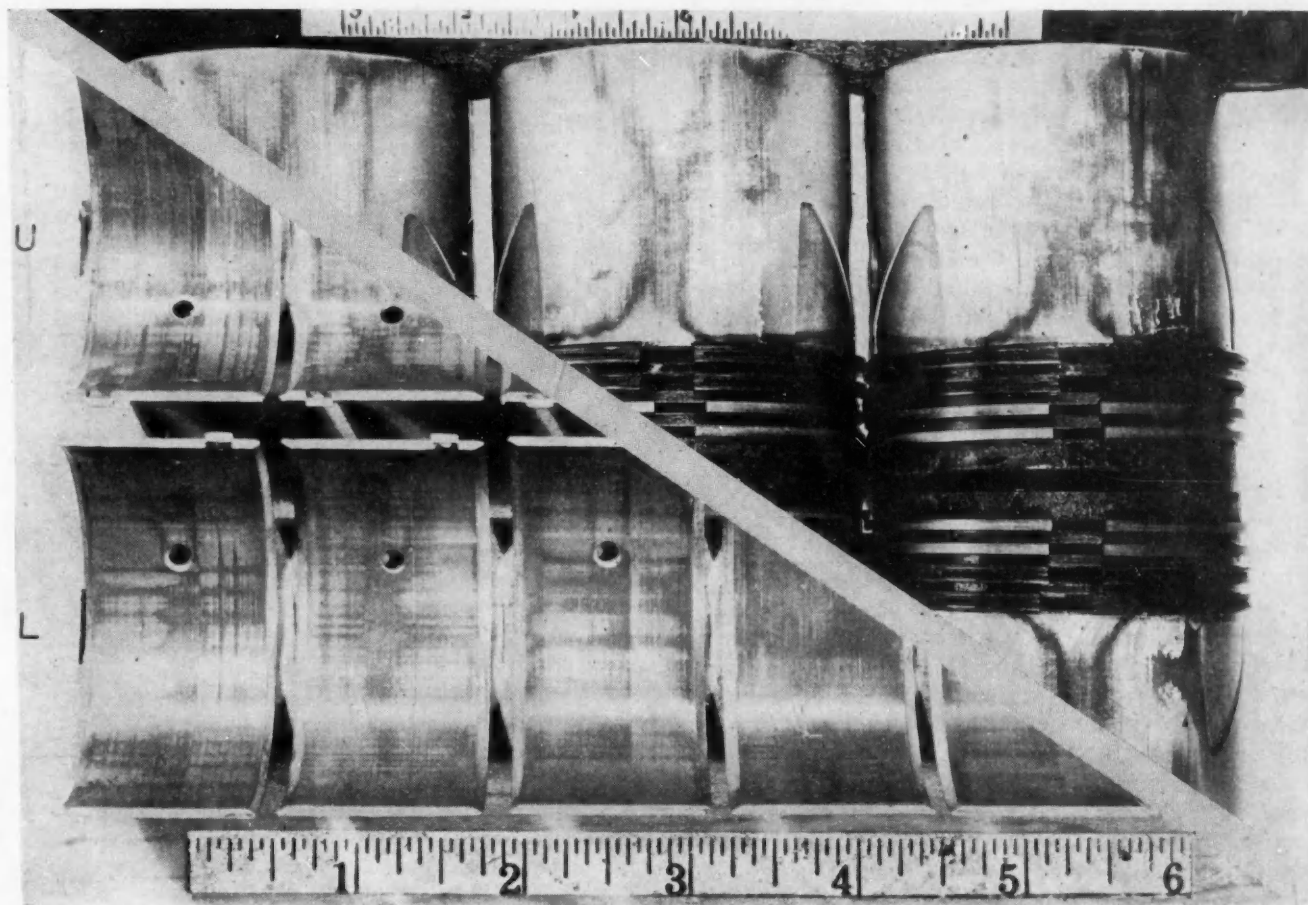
An L-4 test using an oil of the proposed SAE 5W or 5 type left the engine unusually clean and with very low wear measurements. The piston rings shown still had tool marks and the bearings were in perfect condition
